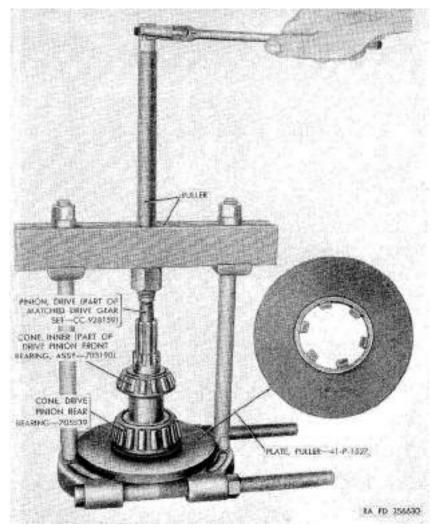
Removing drive pinion bearing cones with puller and puller plate \$11-P-1527.
